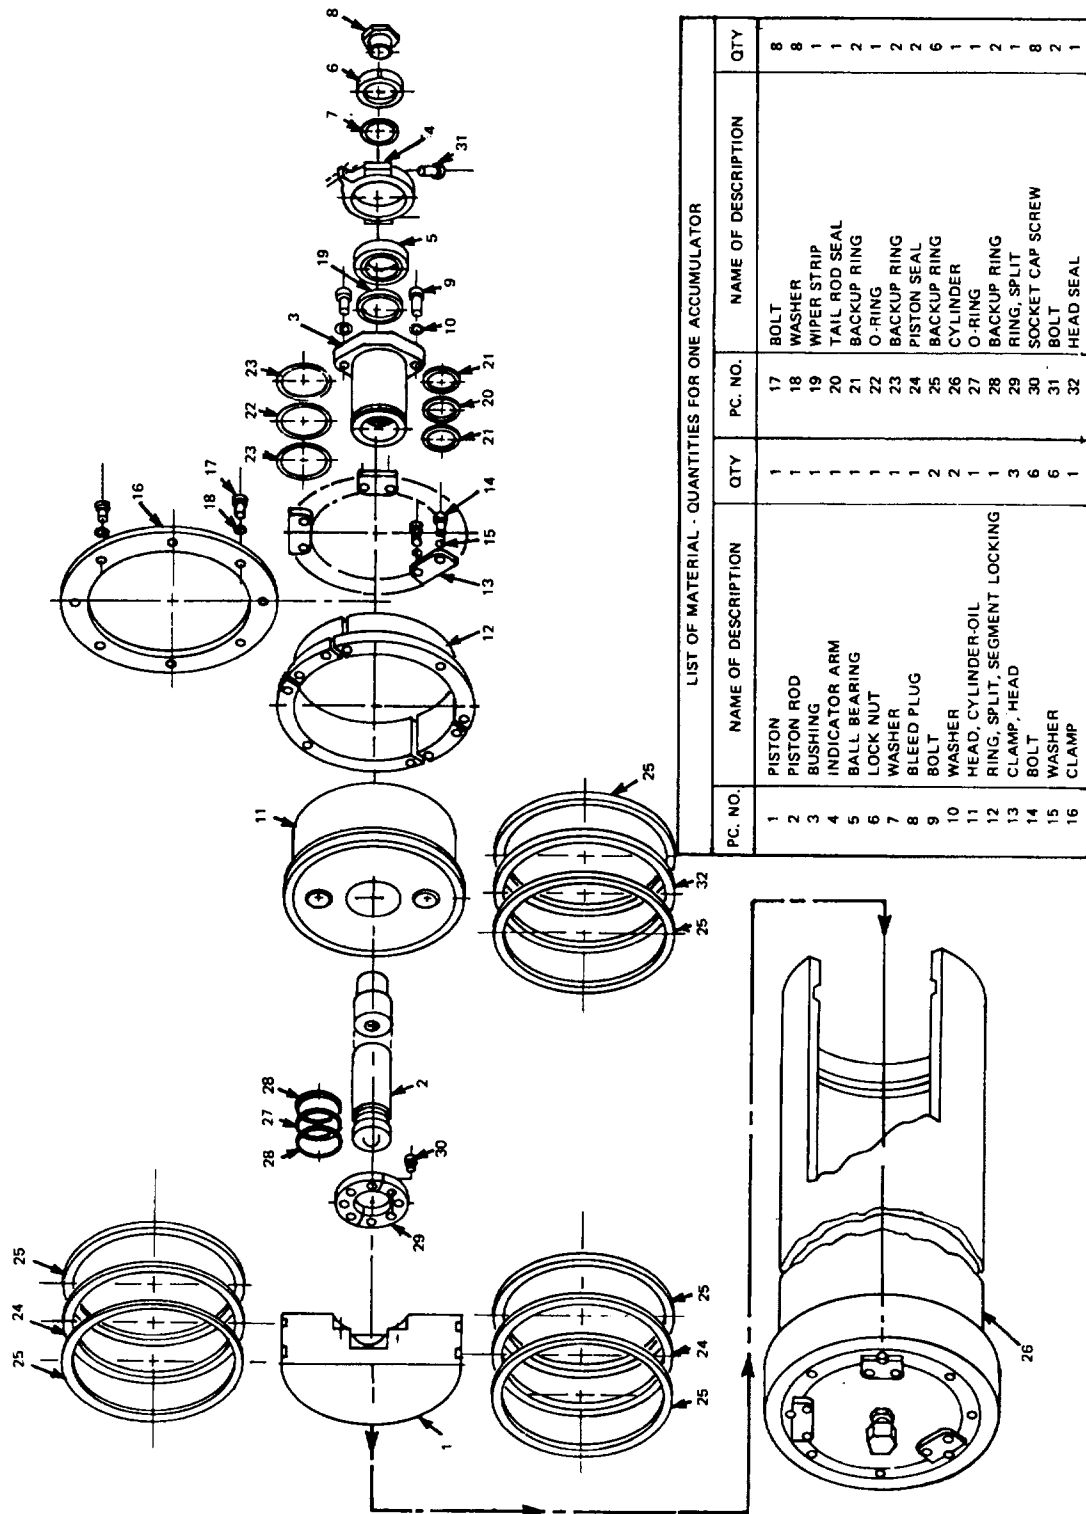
Exploded View of Piston Tailrod Type Accumulator
